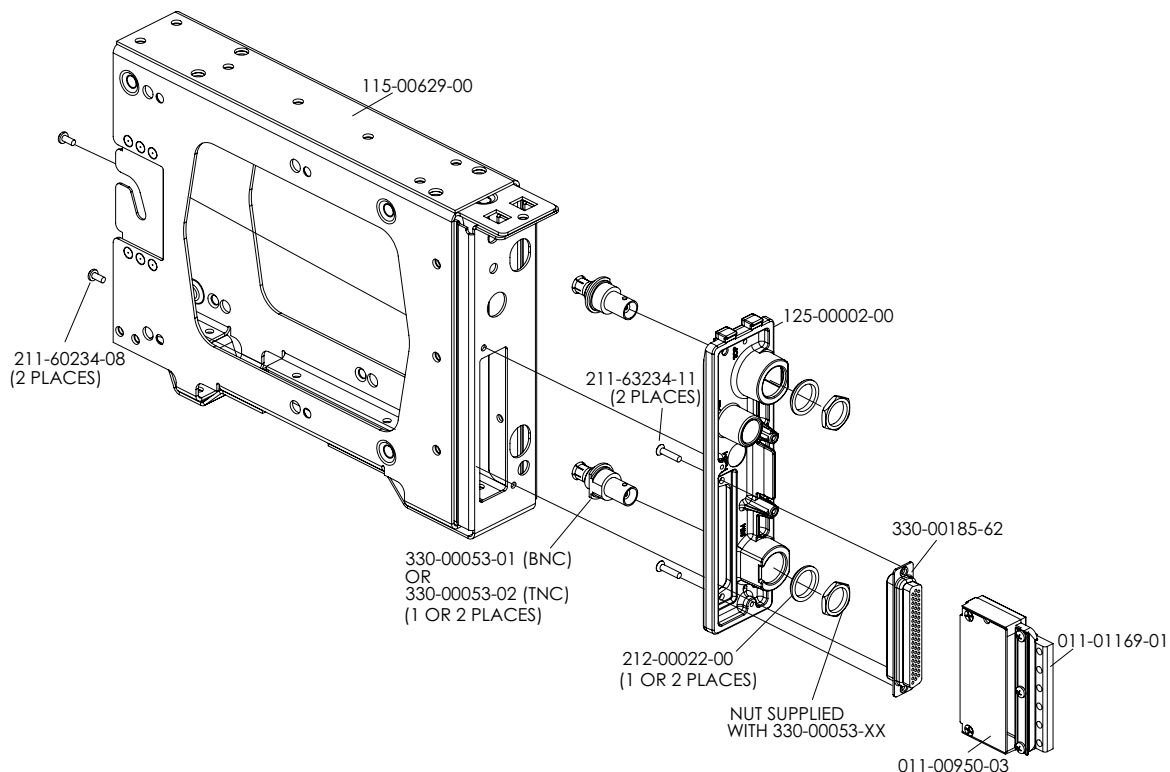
GTX 33 Mounting Rack/Connector Assembly
